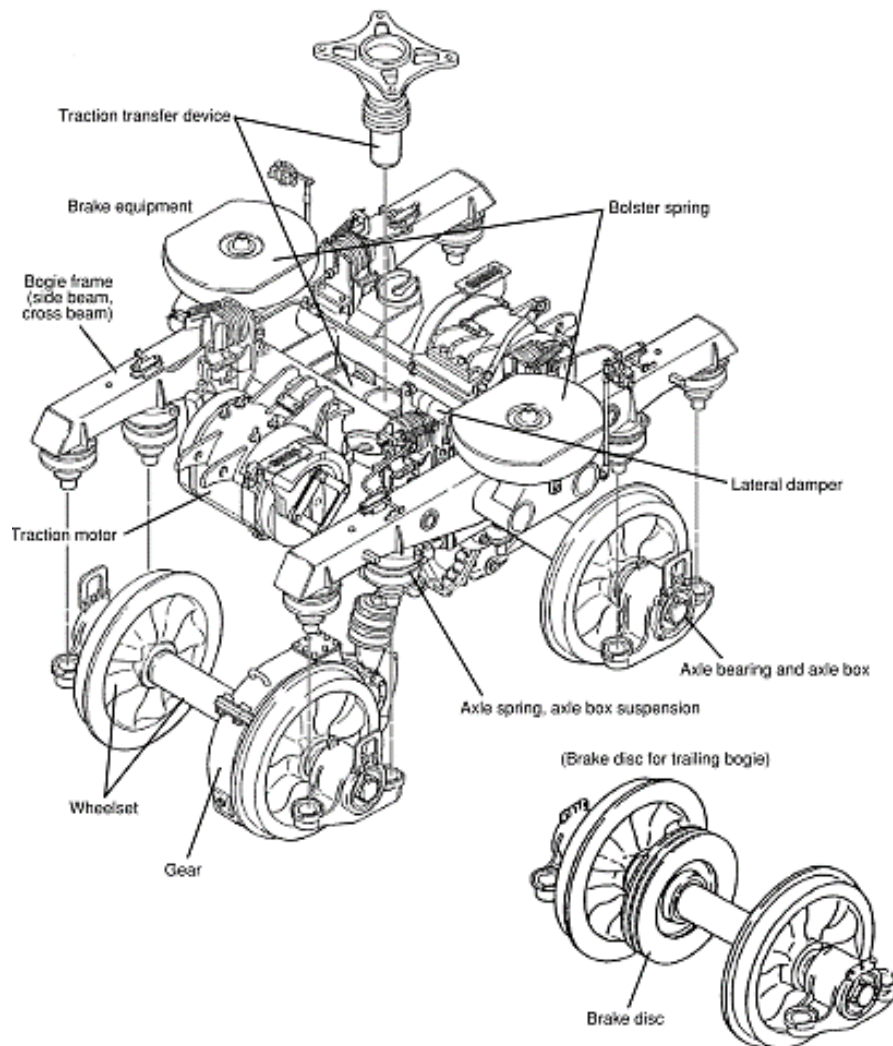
Exploded view of the DT50 bolsterless bogie [17].
